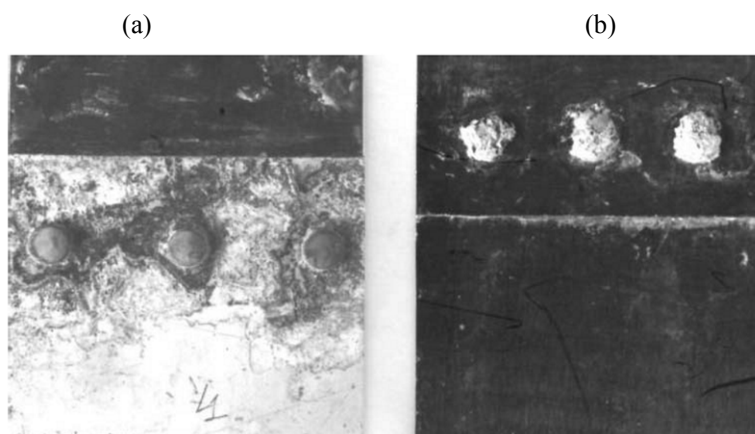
Samples after corrosion tests in a salt mist chamber: (a) D16AT (CAOC), KMU-3l, VT-30 welded joints and (b) KMU-3l, KMU-4l, V65 welded joints (CAOC). Test time 6 months.
